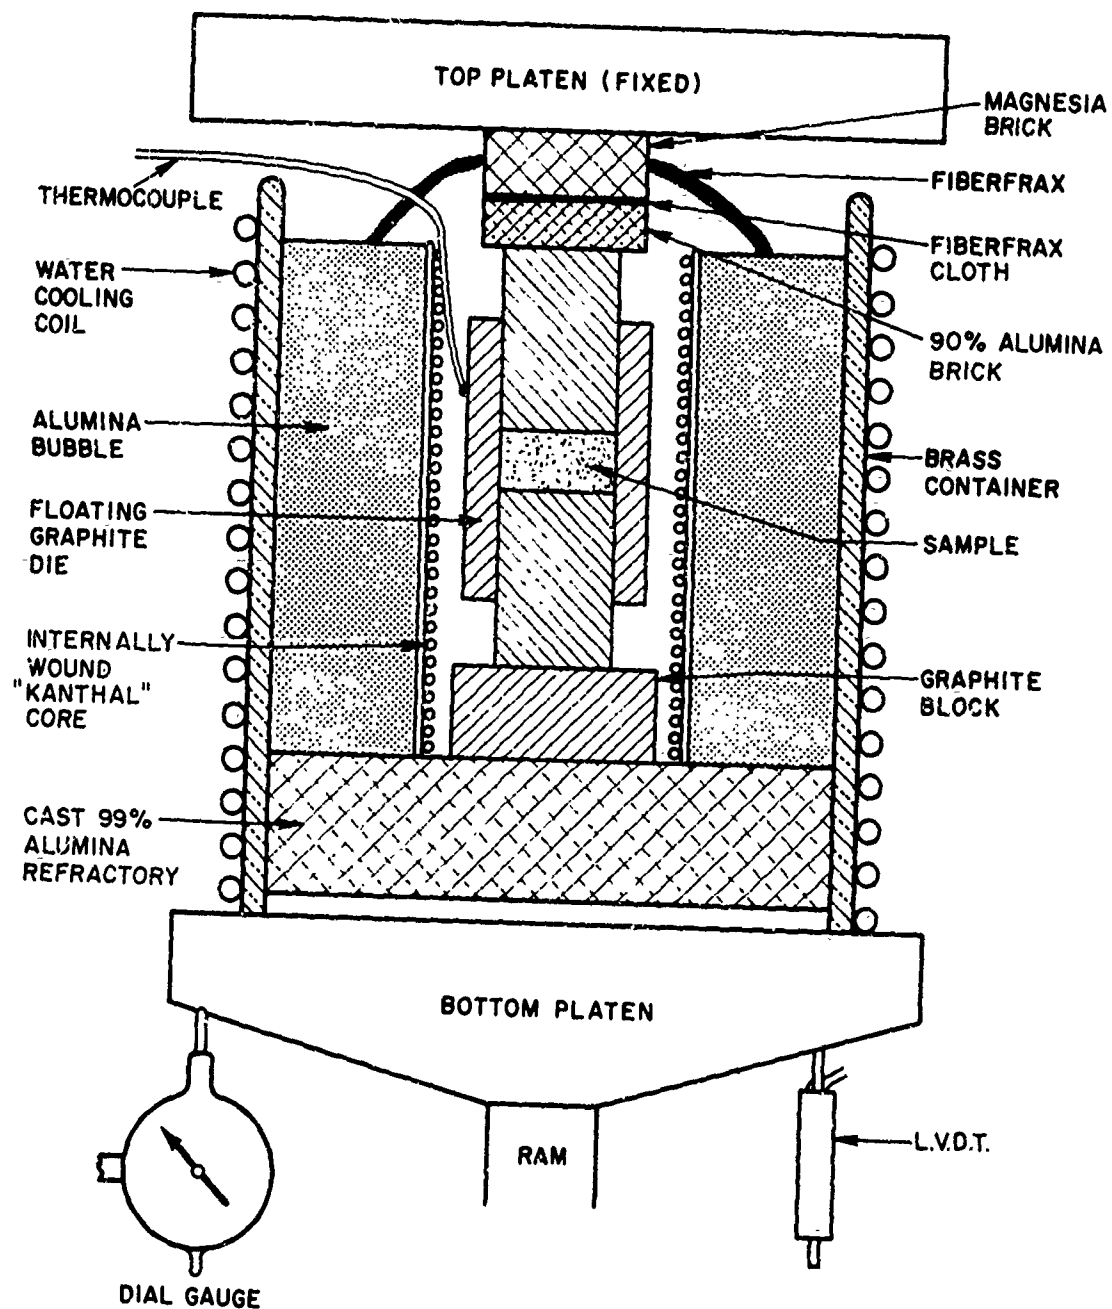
Interior Assembly of Hot Press for Fabrication of 4" Diameter Specimens
